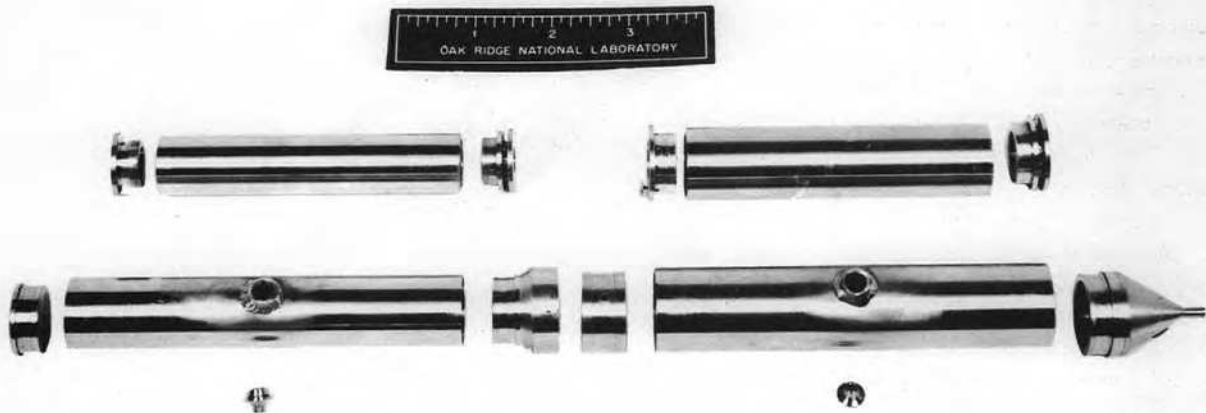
Capsule Irradiation Assemblies Showing Tubes Which Form Gas Annuli.
